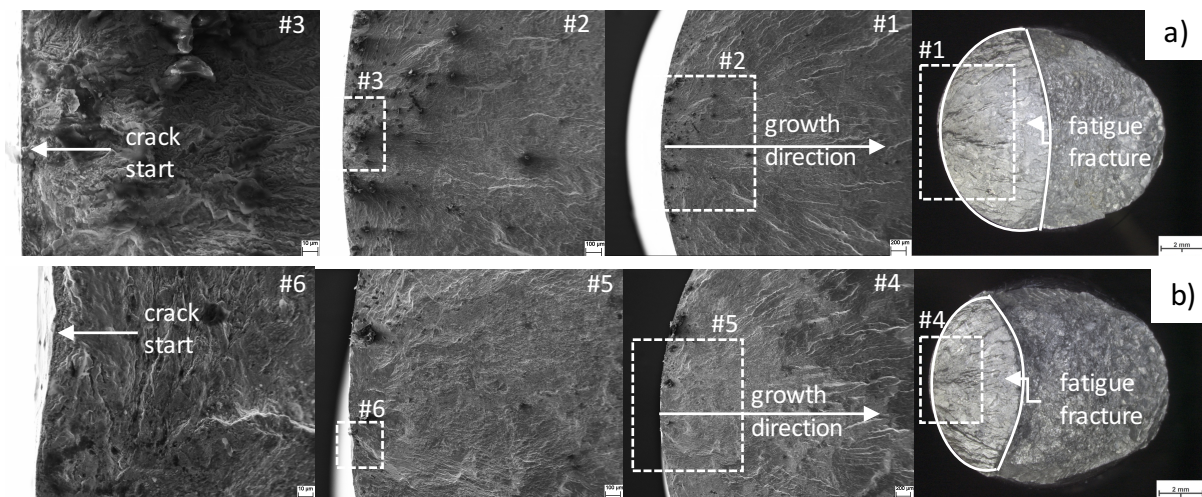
a) Fracture surface of the FB2-2-P, Q&P and b) Q&T with the crack initiation for both starting from the surface.
